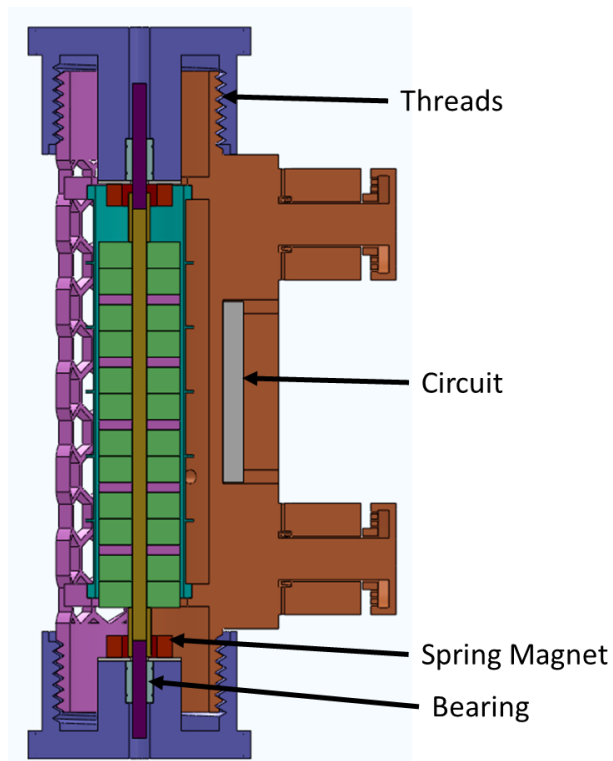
Cross-sectional view of energy harvester, showing threads, bearing, magnet, and circuit mounting.
